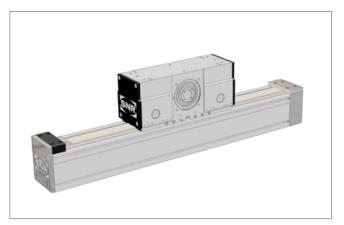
AXC with toothed belt /  $\Omega$  - drive
